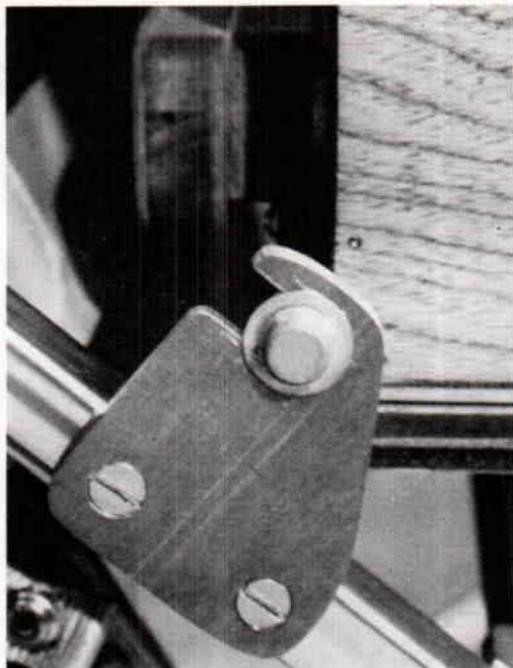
Aluminum bracket used to provide attachment of seat insert.
